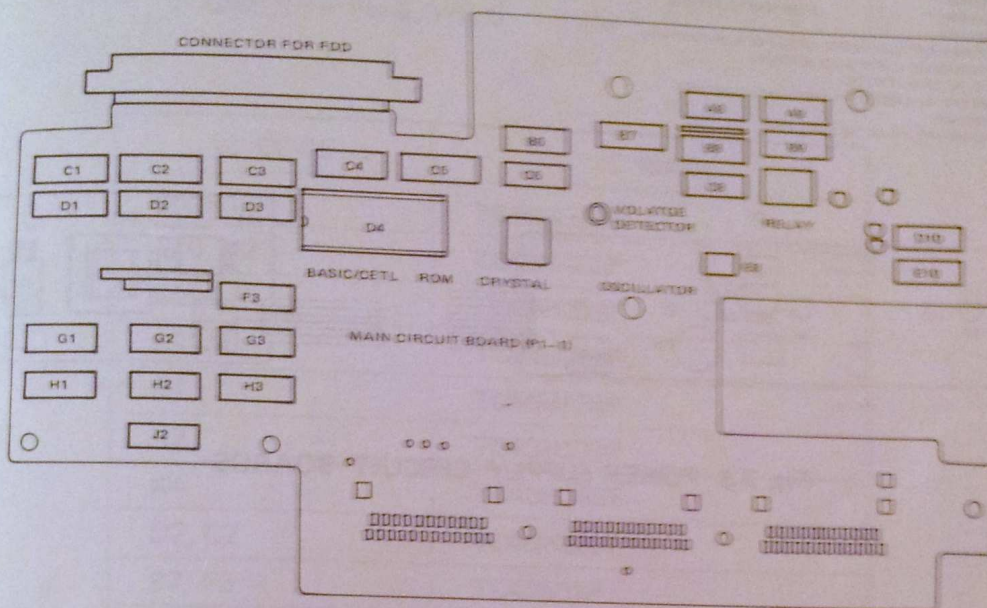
MAIN P.C.B. FROM PARTS-LOCATED SIDE
